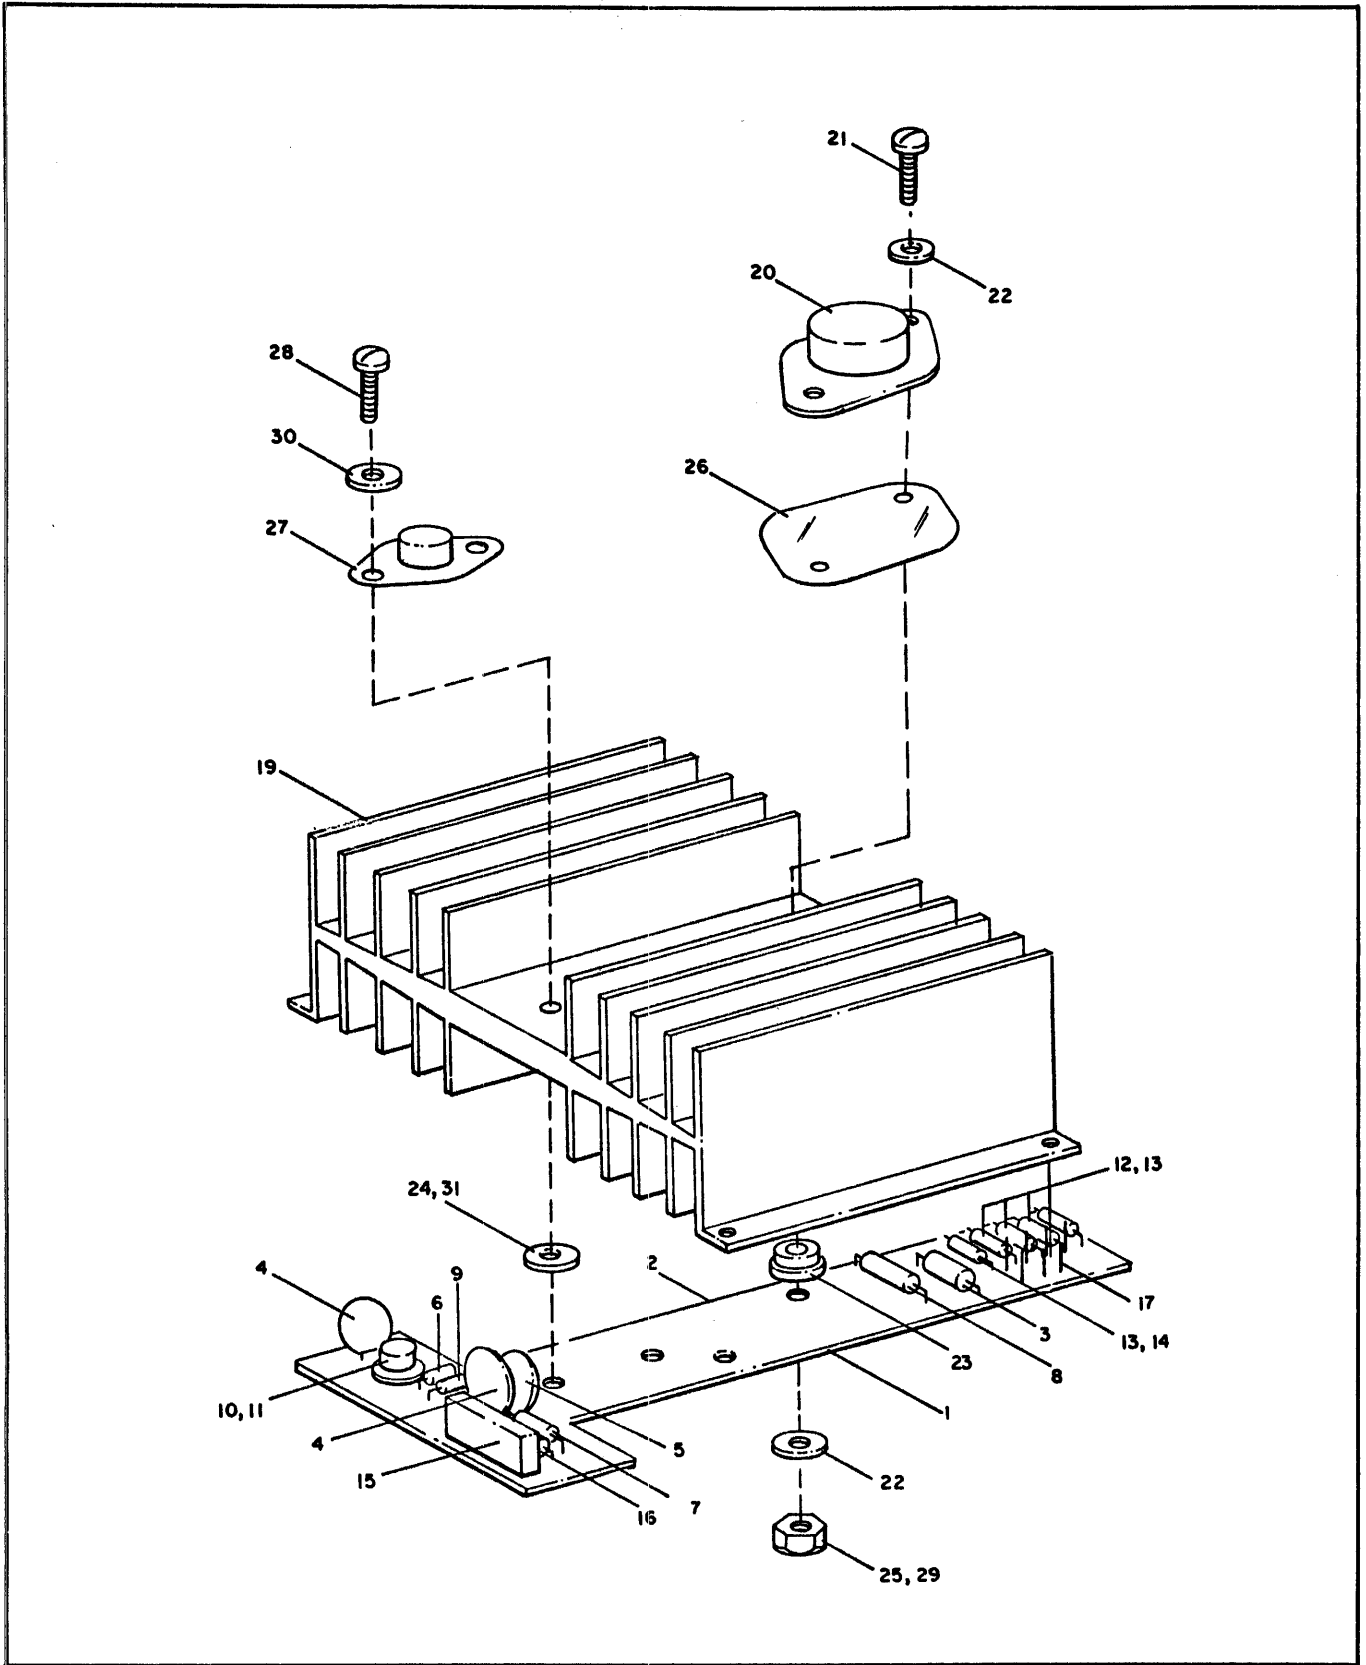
POWER SUPPLY ASSEMBLY
